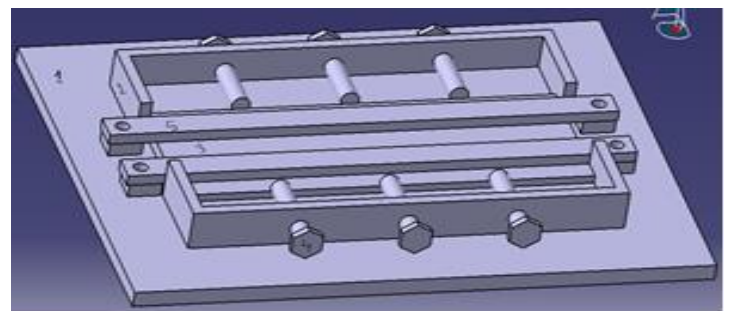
Design in catiaV5. Parts of fixture (a) Base plate (b) side support plate (c) Aluminum plate (d) Bolt (e) Top support plate
